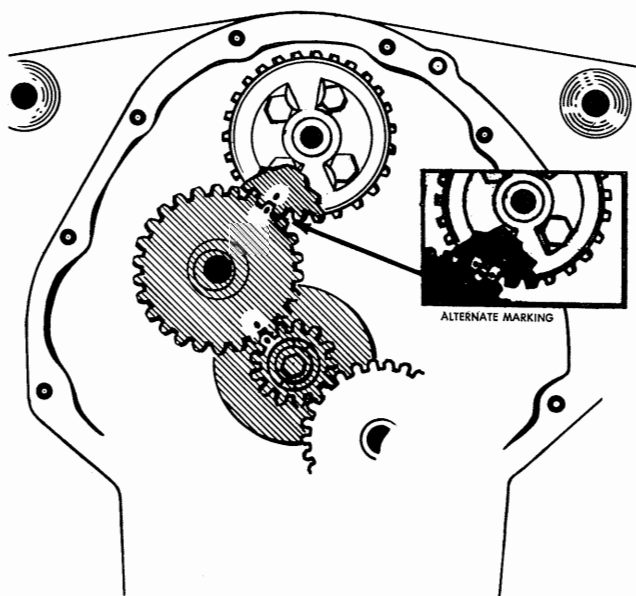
Proper Relationship of Timing Marks on Idler, Camshaft, and Crankshaft Gears
